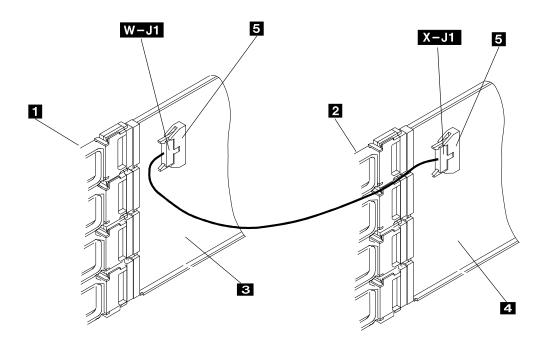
Cable 1 (PN 43G3180) Routing on a TSSB board
